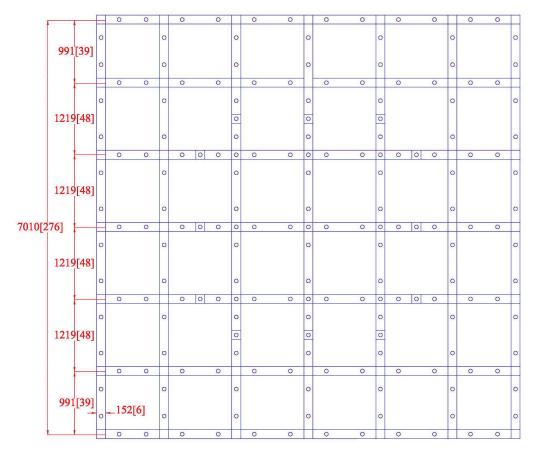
Plan Dimension of Shake Table Extension (units: mm[in])
